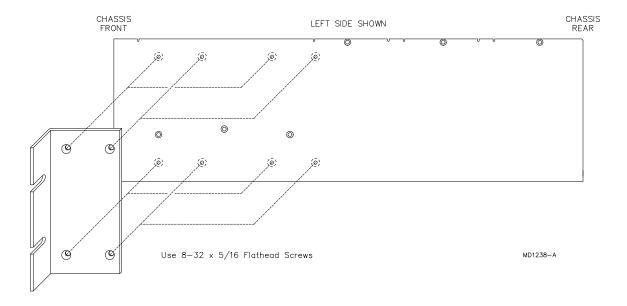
Rack Mount Bracket Installation (Brackets may also be reversed)
